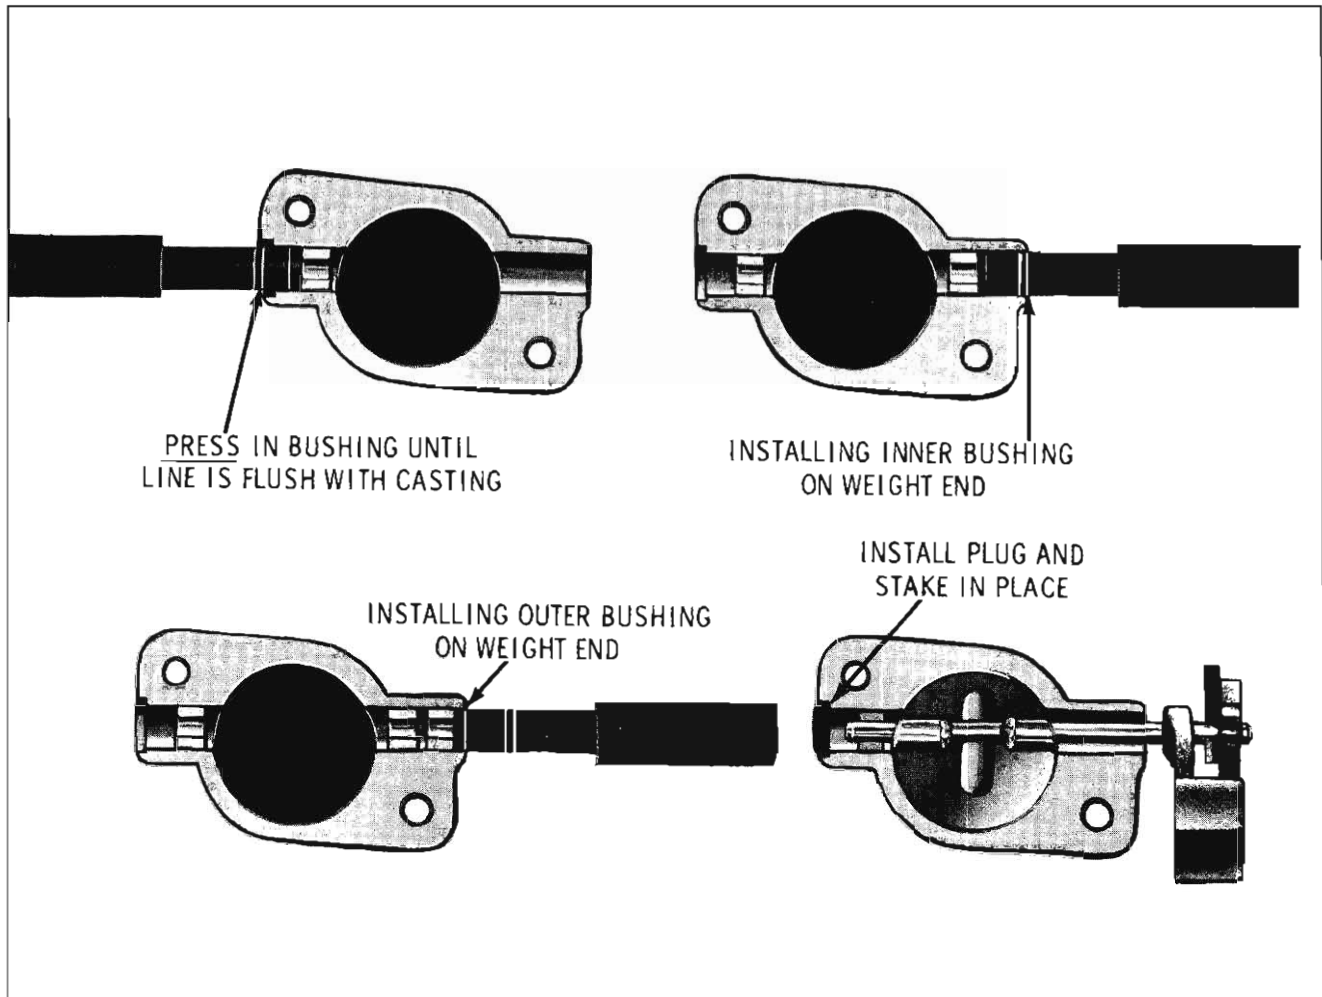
Exhaust Manifold Heat Valve Replacement
